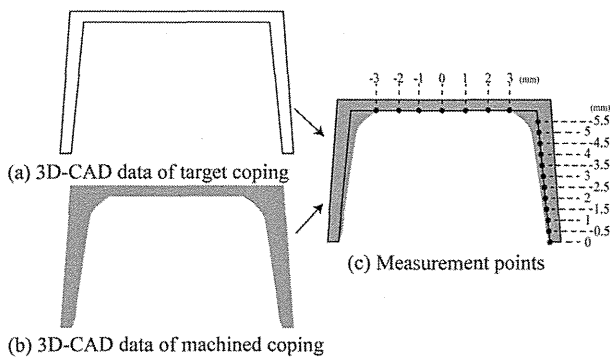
Schematic diagrams of 3D measurement for machining accuracy. The dimensional differences between (a) and (b) were inspected using inspection software. (c) Measurement points in the height and width directions.
